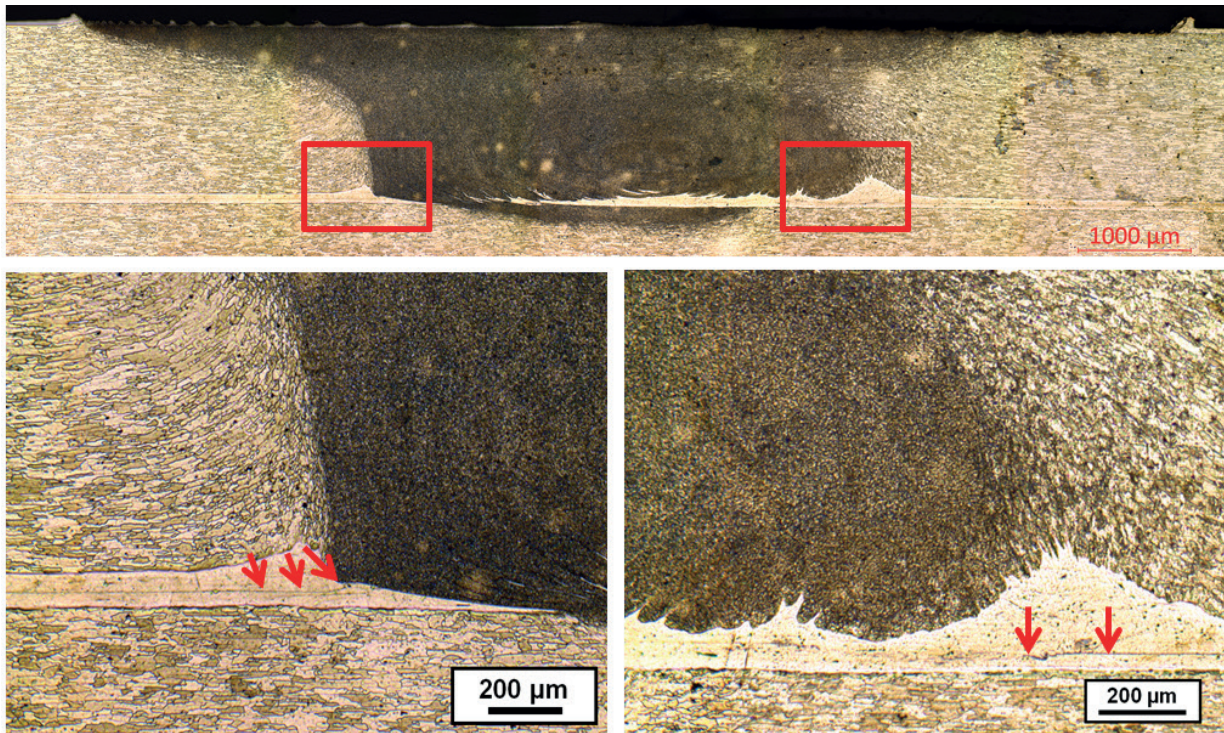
Microstructure of the joint welded according to the parameters: $\omega = 1300 \text{ rpm}$; $v = 300 \text{ mm min}^{-1}$; tool plunging in the lower sheet of 10%: a) total view of the weld cross section, b) contact line at advancing side, c) contact line on retreating side
